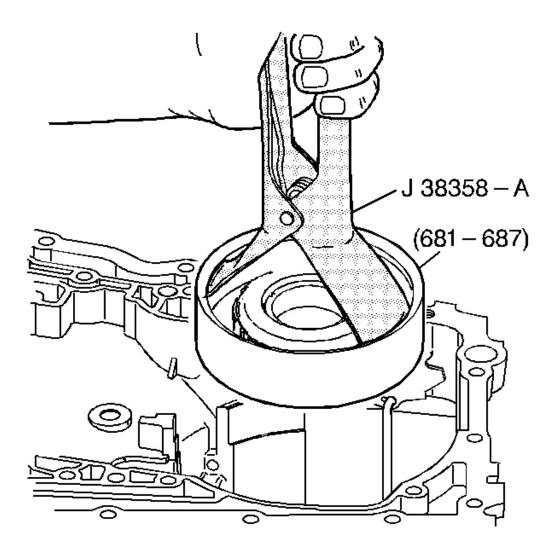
Removing 1-2 Support Drum Out Of The Case Using J 38358-A Courtesy of GENERAL MOTORS CORP.
